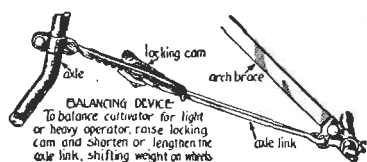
Method of shifting position of axle and wheel to balance cultivator frame.
